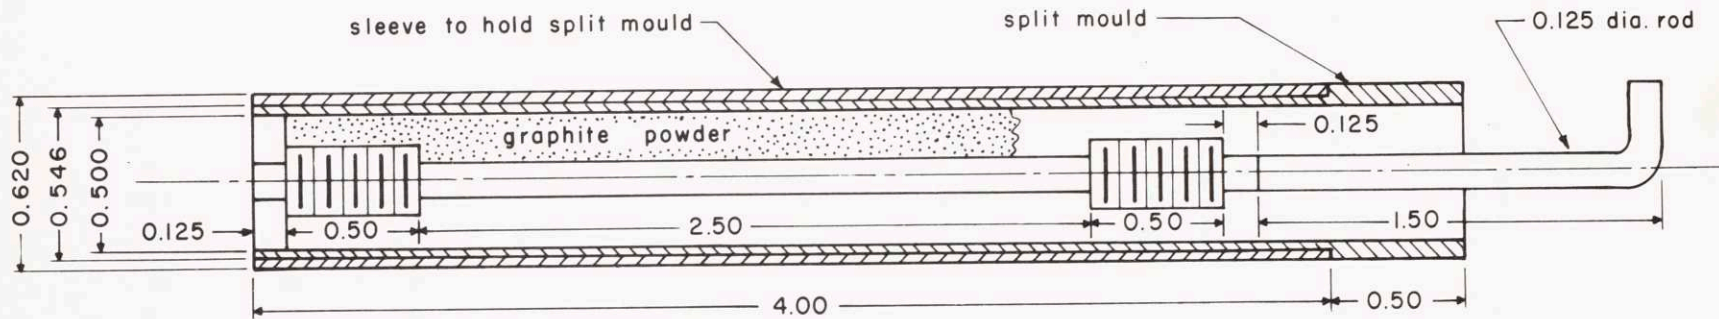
I. Longitudinal section through cylindrical split mould with machined blank in place.
